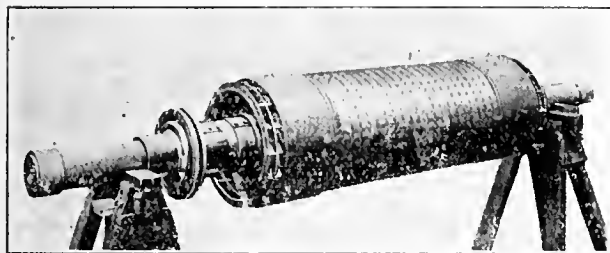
COMPLETED 8,000-K.V.A. ROTOR.
